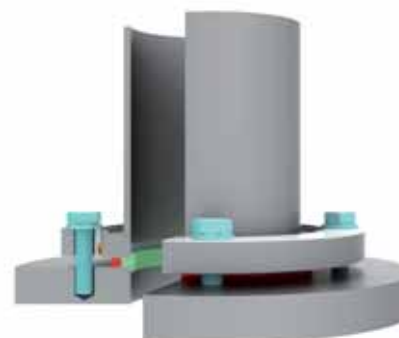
ISO-K flange mounted on base plate with centering ring, bolt ring and screws
